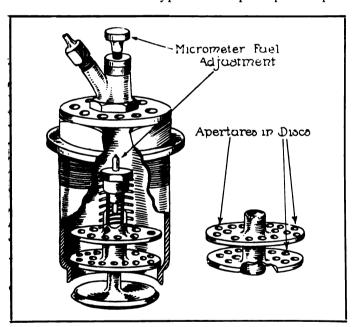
The Carlton All-Fuel Carburetor, a Diminutive Valve Type of Vaporiser Having Double Discs.
